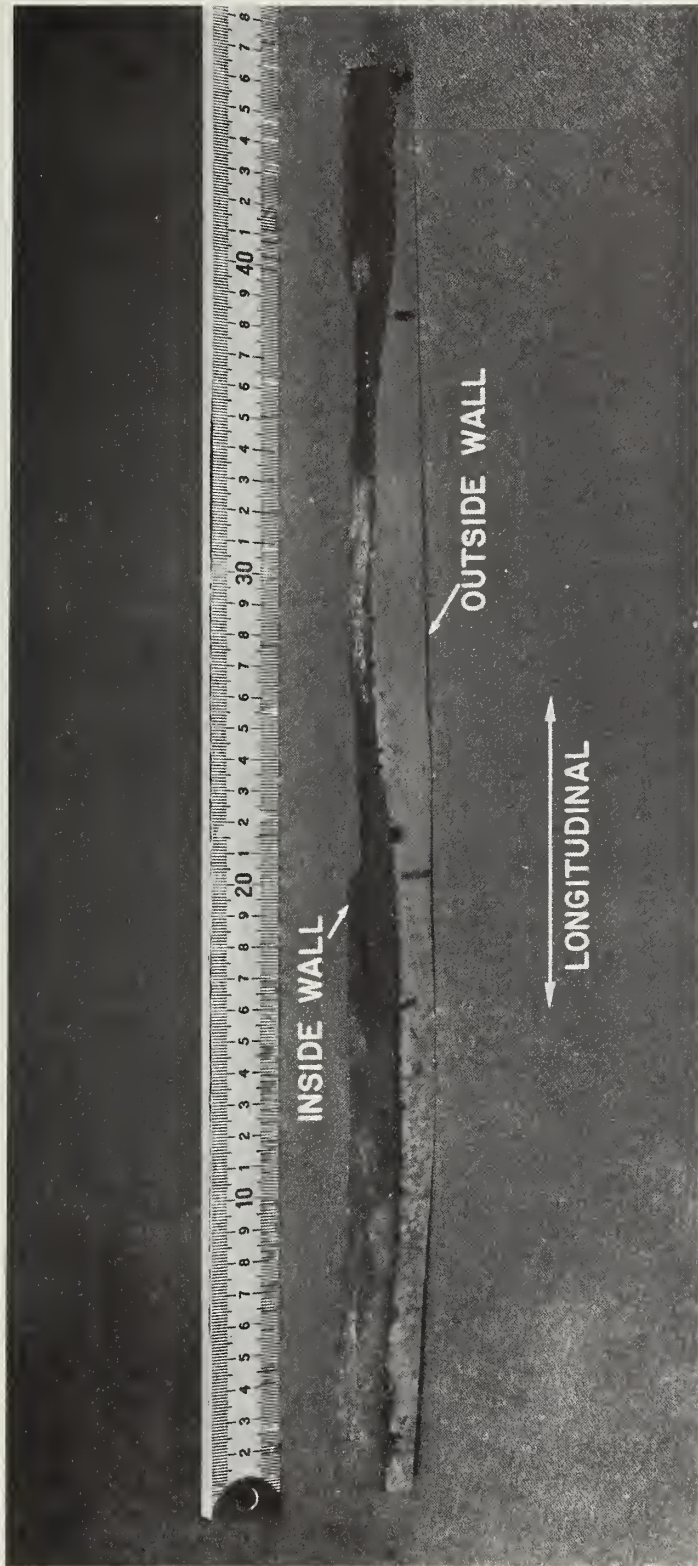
Seventeen-inch long segment cut from edge of piece RR-12 along the line labeled "saw cut" in Figure 5. The scale is in centimeters. The fracture origin is opposite "31" on the scale. The transition from flat fracture to full slant fracture occurs to either side of the fracture origin, between 20 and 39 on the scale.
